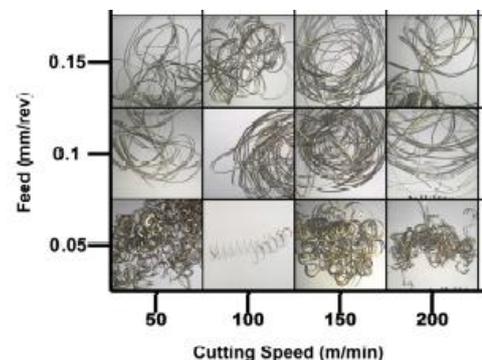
Graphical representation of chips obtained when machining AISI 304 workpieces at various cutting speeds and feeds (test conditions: depth of cut=0.5 mm, machining length=30 mm.) [4].
